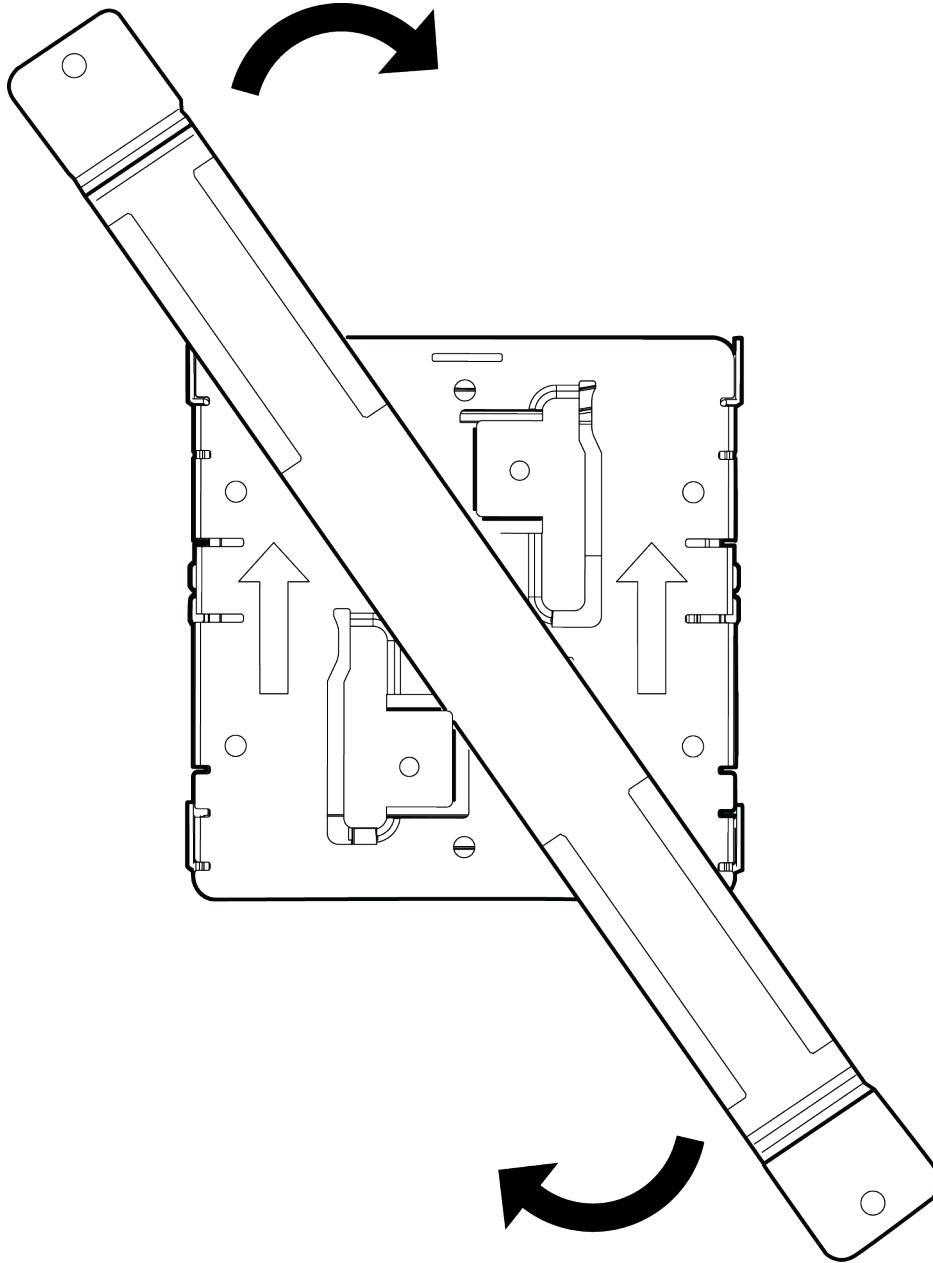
Attaching the optional flat metal easy-attach adaptor to the main mounting bracket
